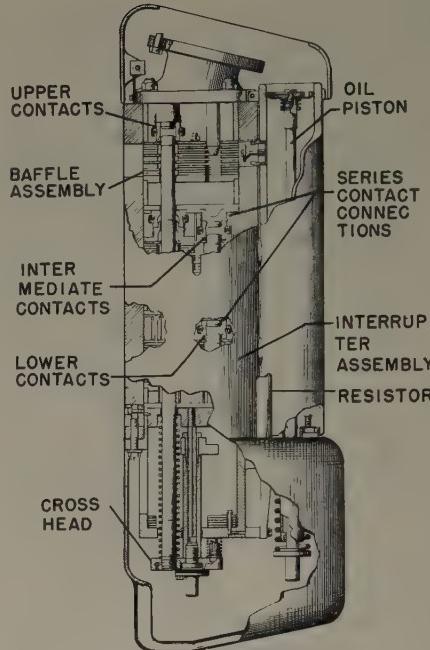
Sectional view of the 330-kv impulse interrupter showing the three simultaneously operating series breaks, laminated insulation structures for directed oil flow, and the auxiliary oil piston
